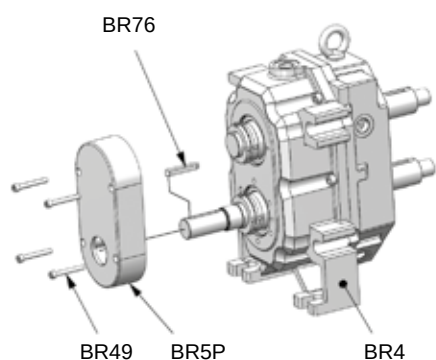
Disassembly of the gearcase step 1 version P.
